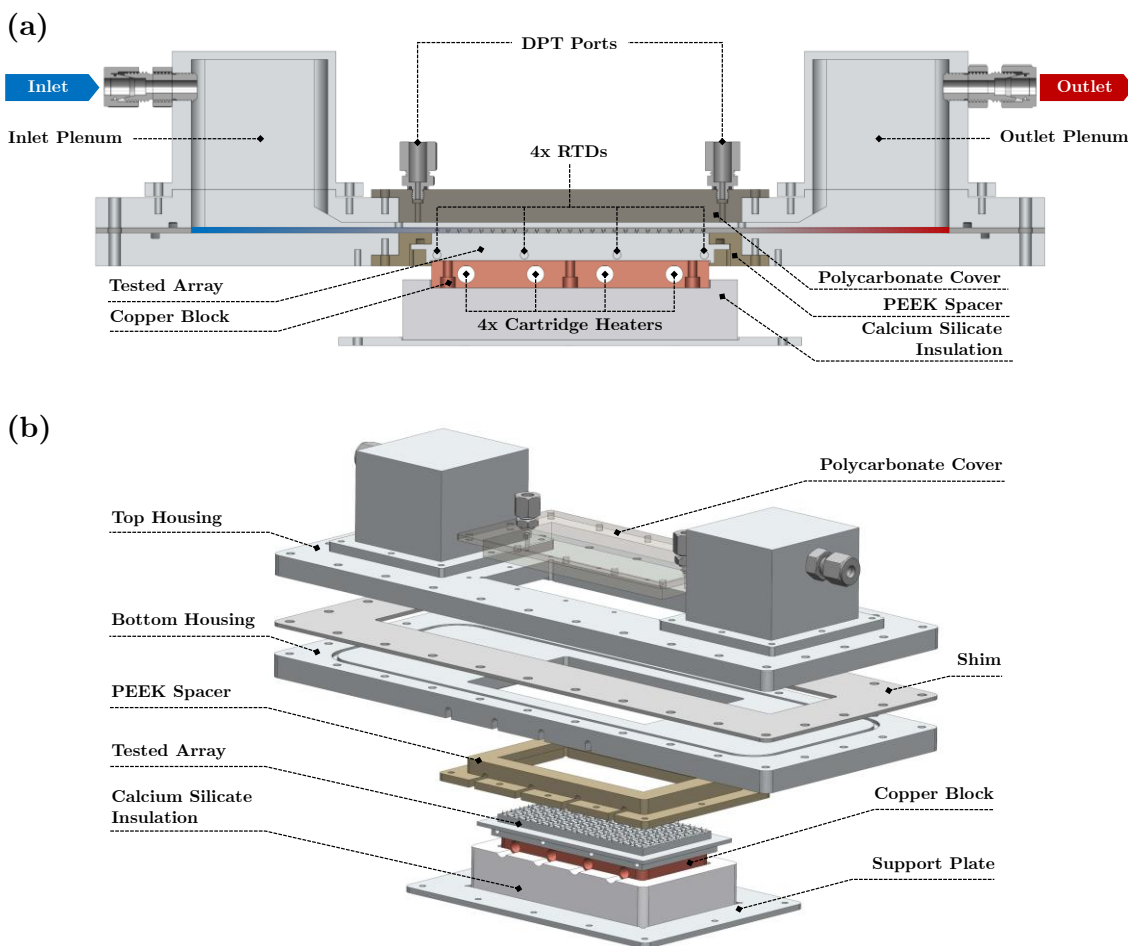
Views of the test section: (a) cross-sectional view and (b) exploded view.
